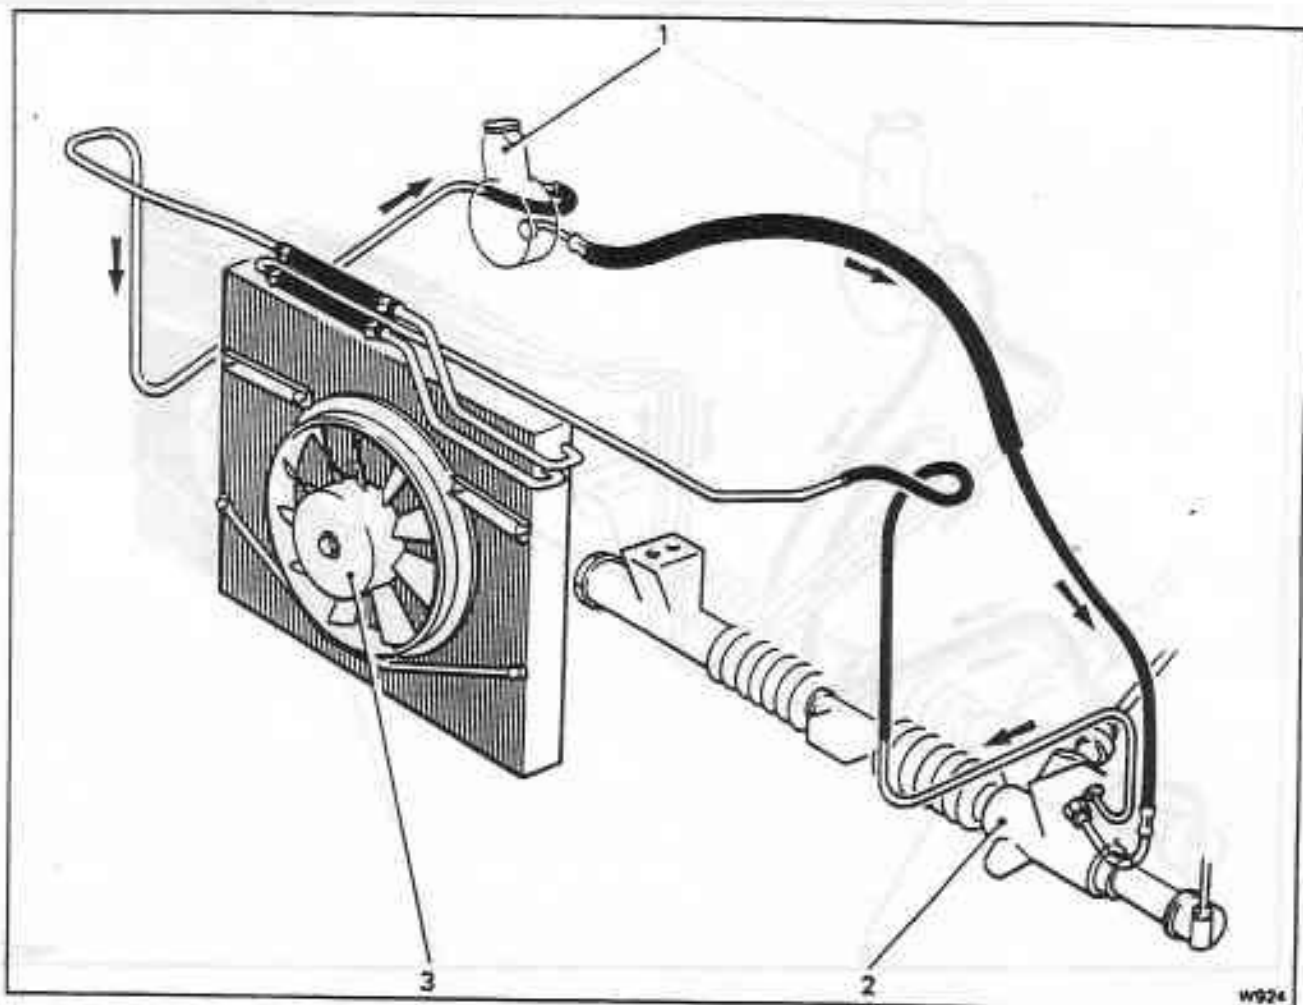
Hydraulic pipe run. Left-hand drive cars
